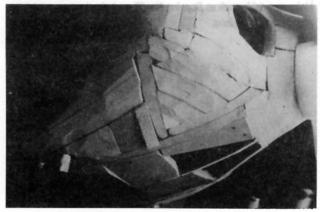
Shaping up bottom of cowling and forming air inlets.
